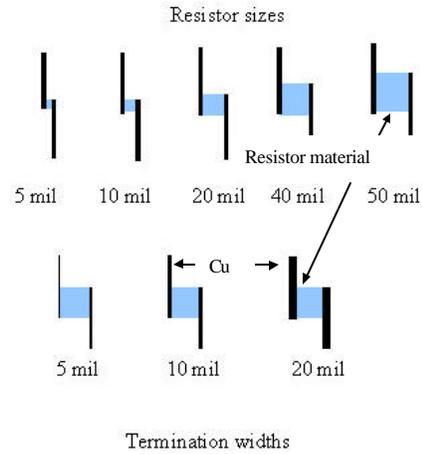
Embedded Resistor Printing – A Close-Up
